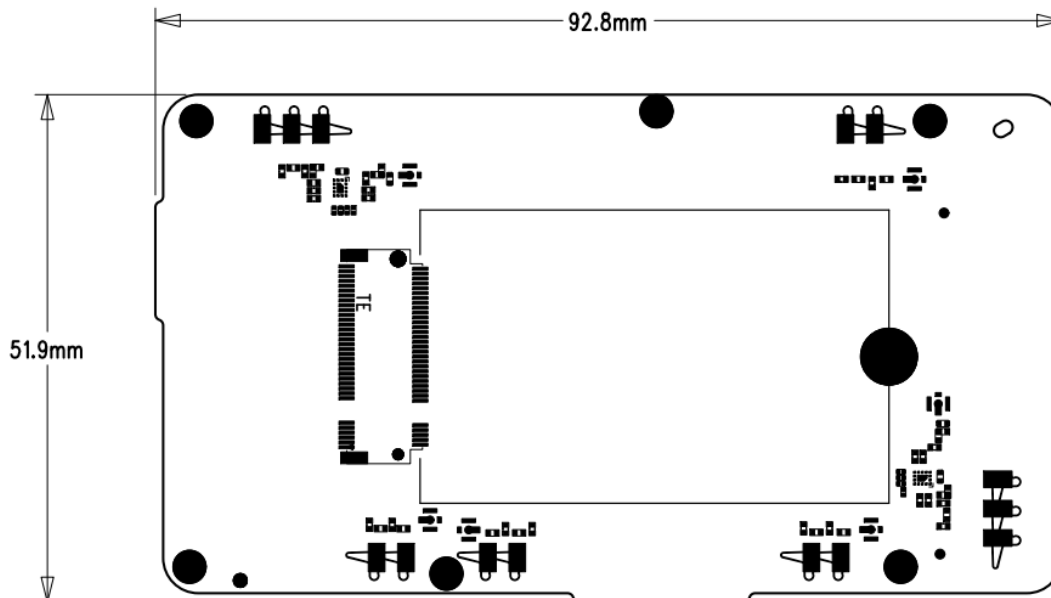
5G S-Module All-in-one Type-M PCB Size
